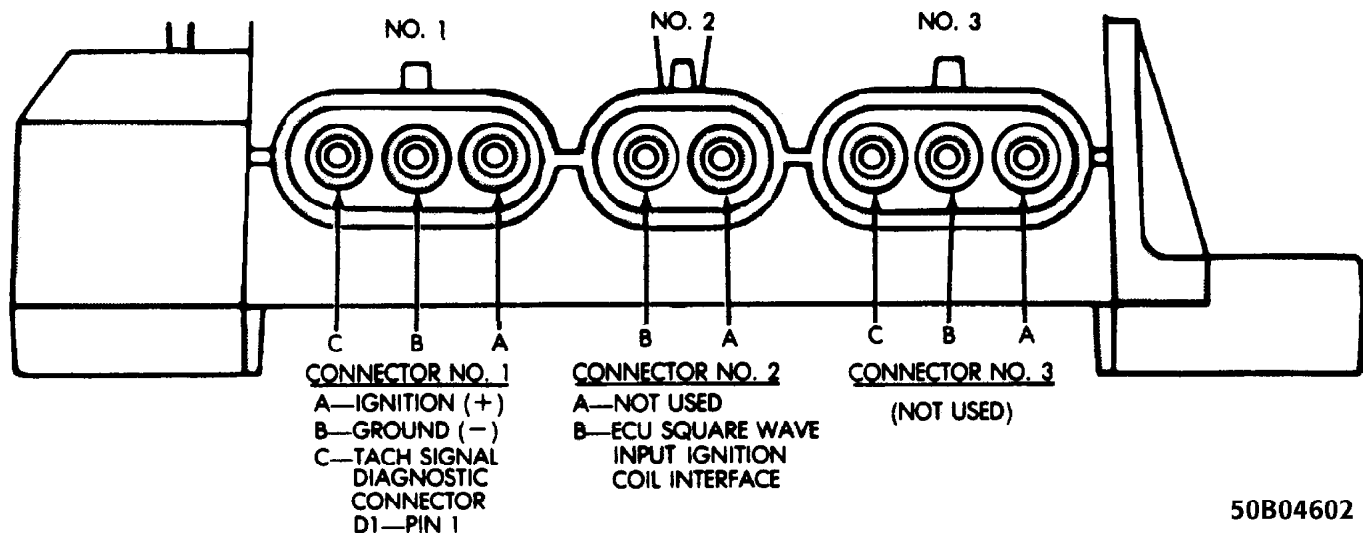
View of Ignition Control Module/Ignition Coil Assembly
